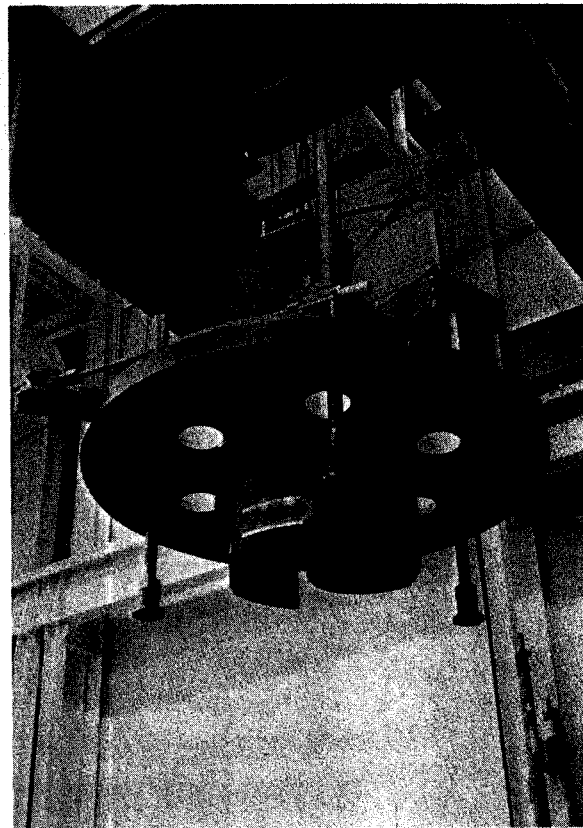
Upper pole cap with its spiral iron sectors and trim coils being lowered with crane onto magnet.
